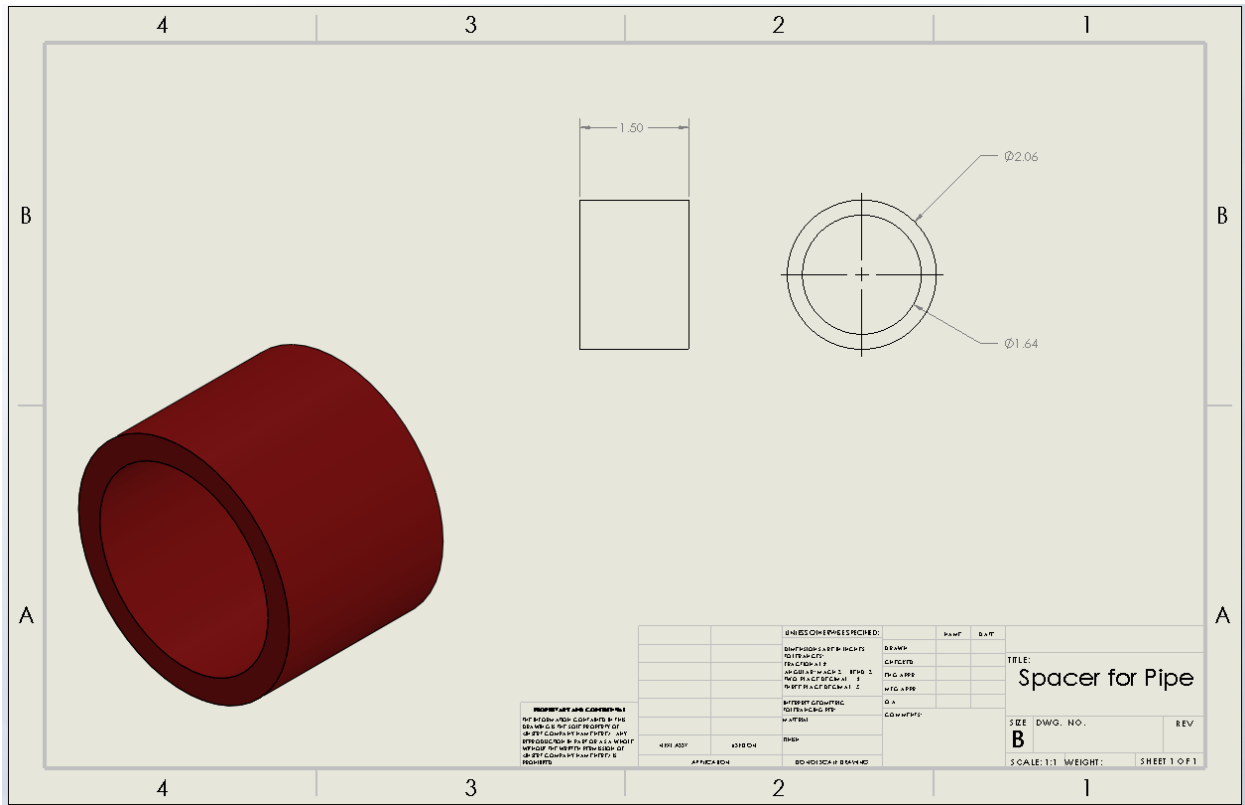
Spacer for Shaft Bearing in Two-Inch PVC Pipe Engineering Drawing
